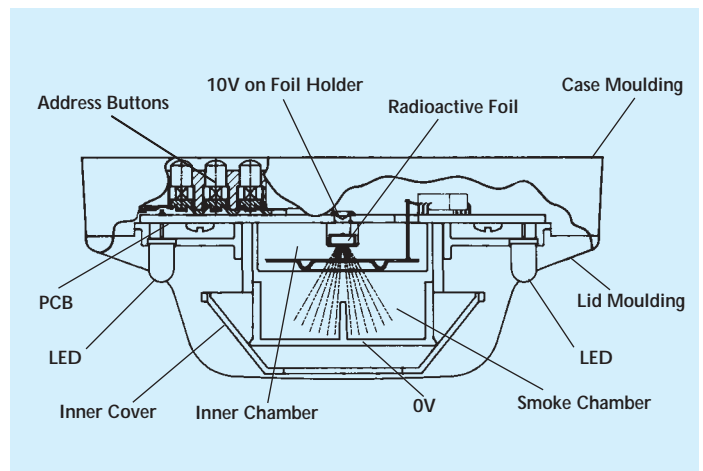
Sectional view - Discovery Ionisation Smoke Detector
